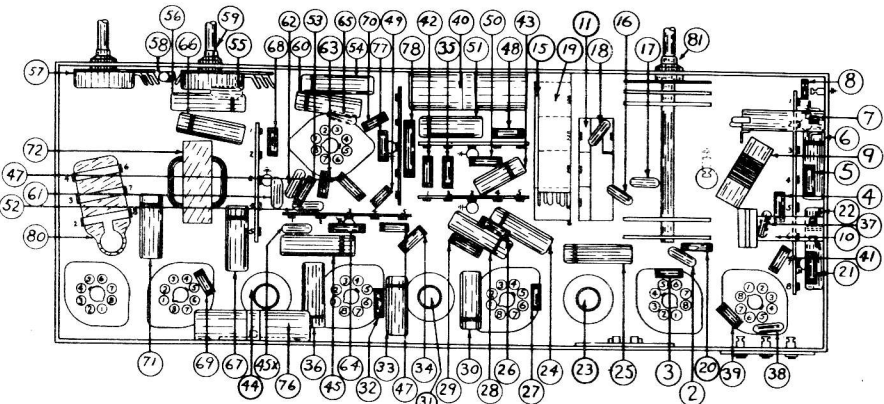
LOCATIONS OF PARTS—UNDER CHASSIS
